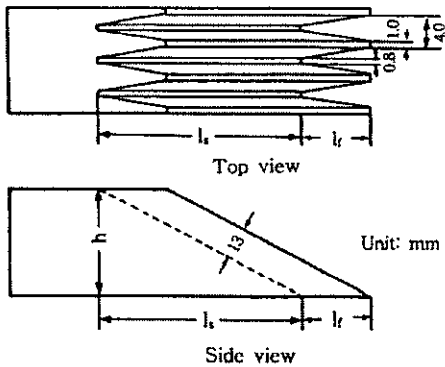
Type of specimen with a sloped finger-joint to be tested.
